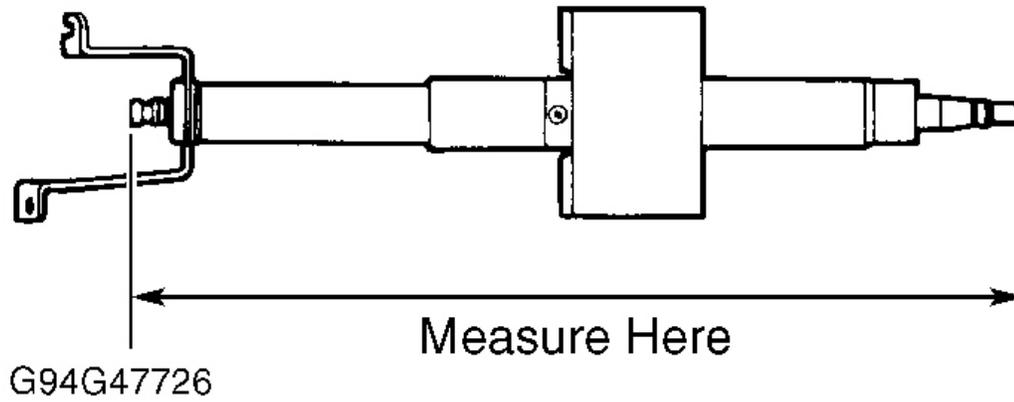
Measuring Steering Shaft Dimensions (Miata)
